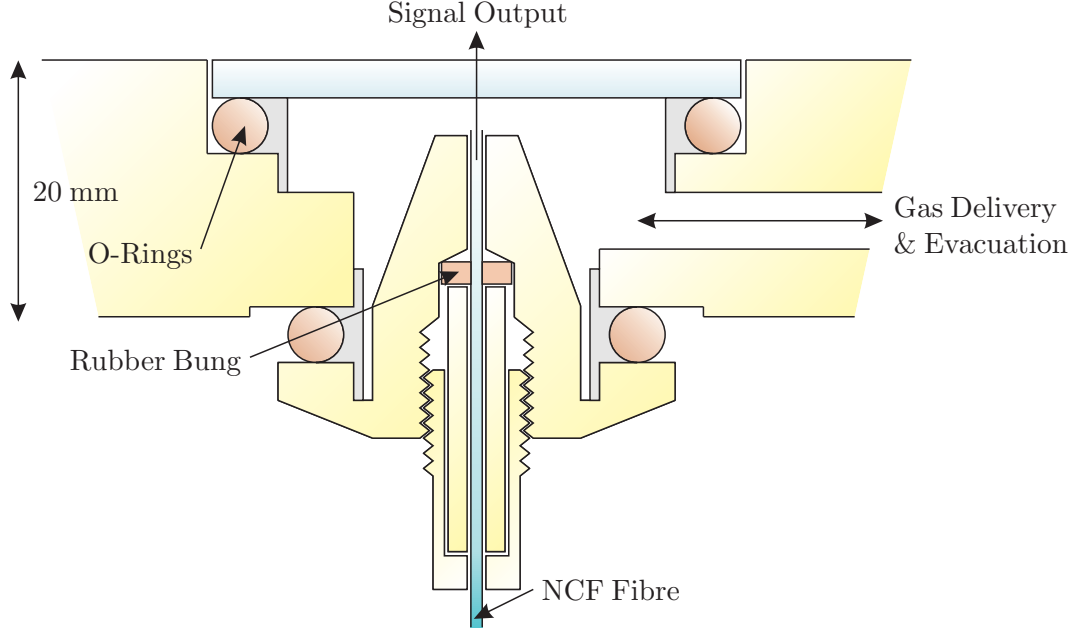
Diagram of the removable fibre holders used in the vacuum system.
